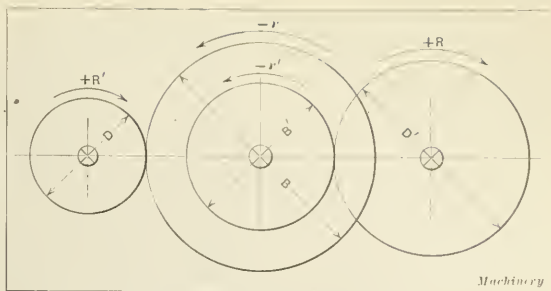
Simple Gears in Fixed Bearings with Intermediate Compound Idler
